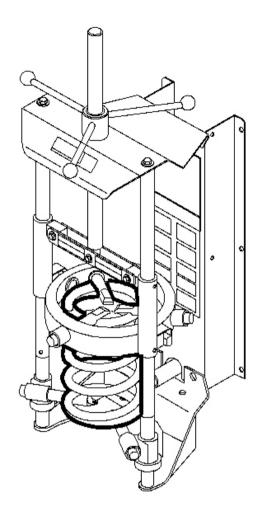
Strut & Spring Assembly Courtesy of GENERAL MOTORS CORP.
